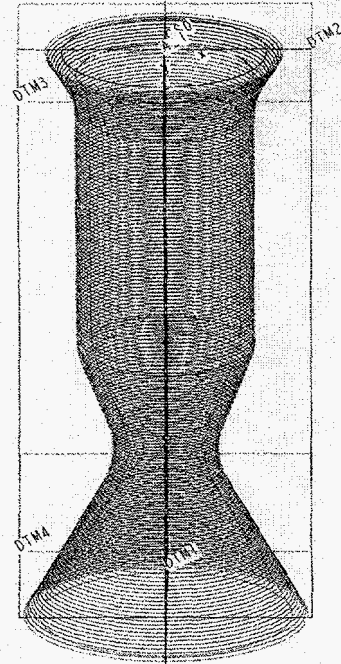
Tool Path for Laser Deposition of Rocket Nozzle.
